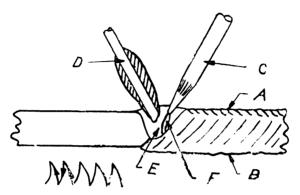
Welding cast iron by the carbon arc process: A. Bead, B. Penetration, C. Carbon electrode, D. The fluxed filler rod, E. The crater, F. The arc
